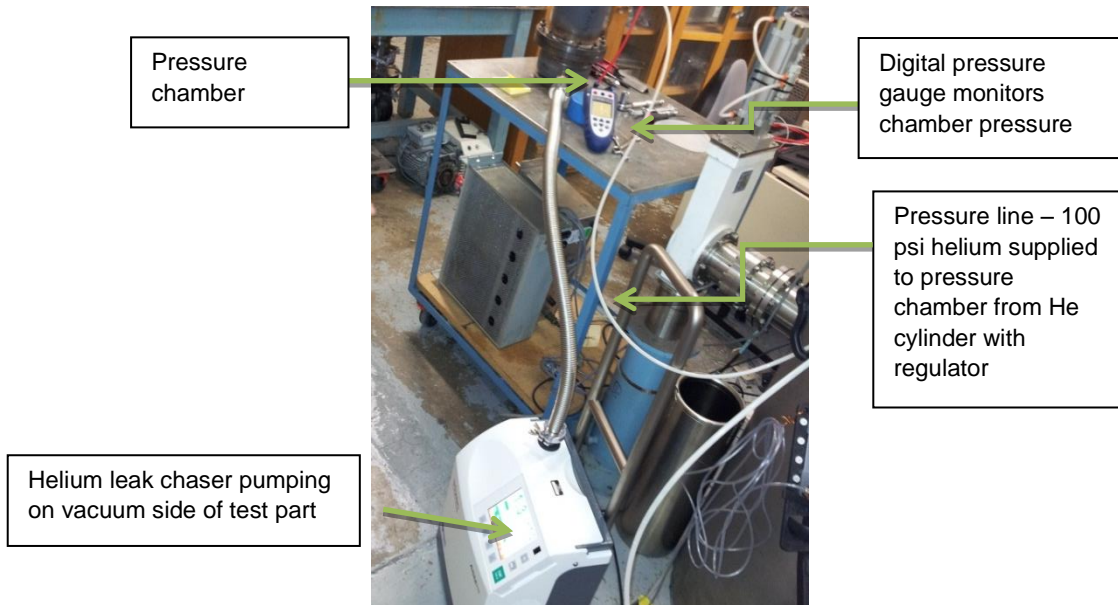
Helium leak chasing of gas stripper parts in pressure chamber
